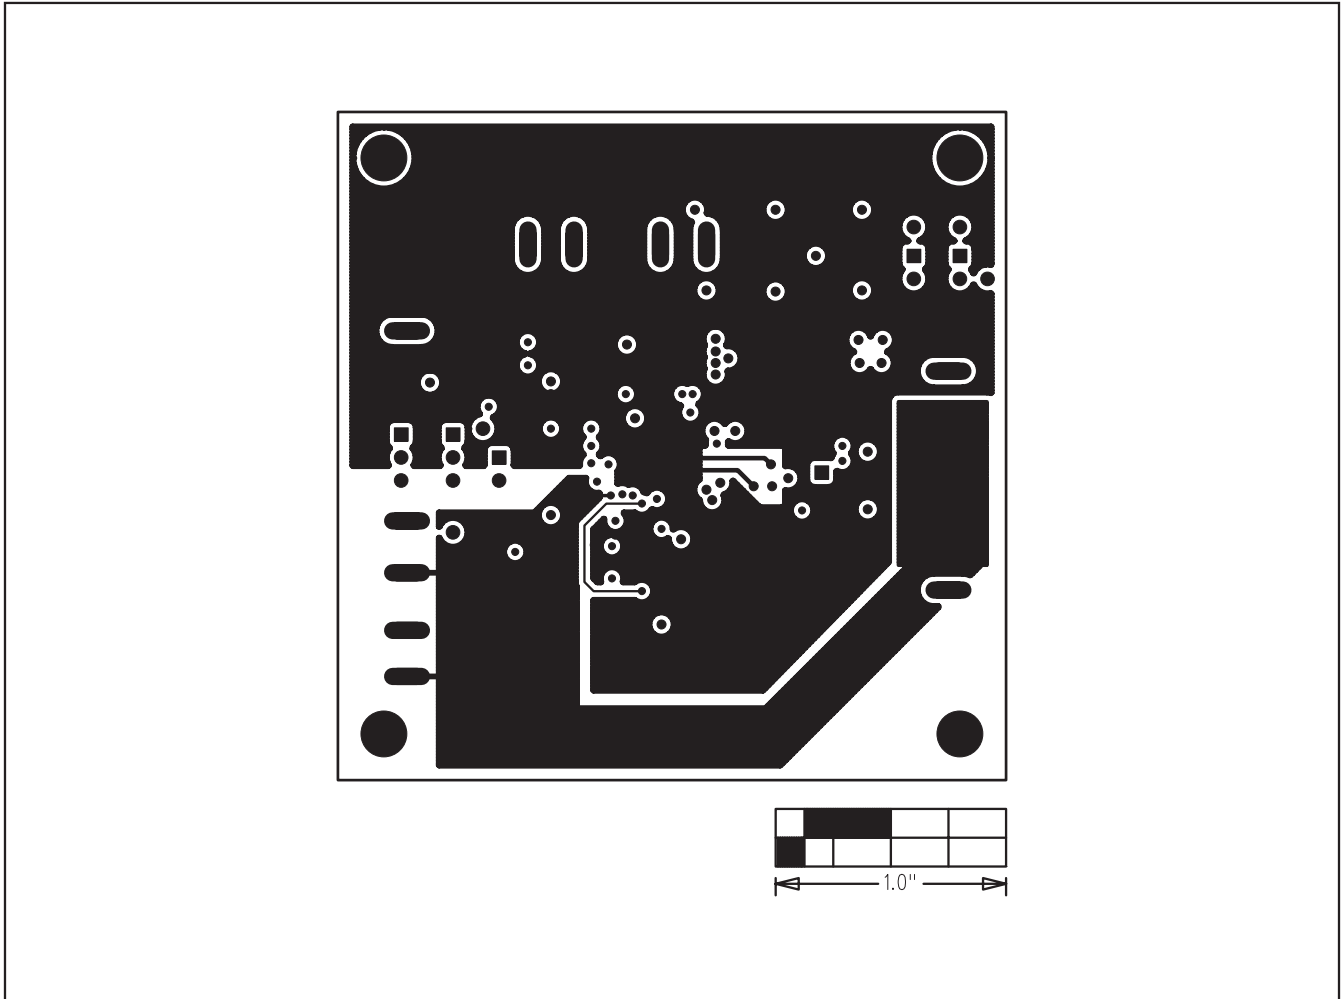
MAX17014 EV Kit PCB Layout—Solder Side
